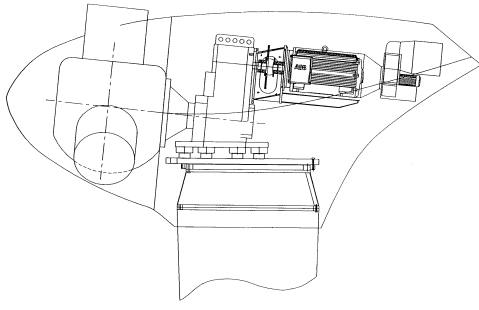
Nacelle with transmission system for which the main bearing is integrated in the gearbox. Courtesy NEG Micon.
